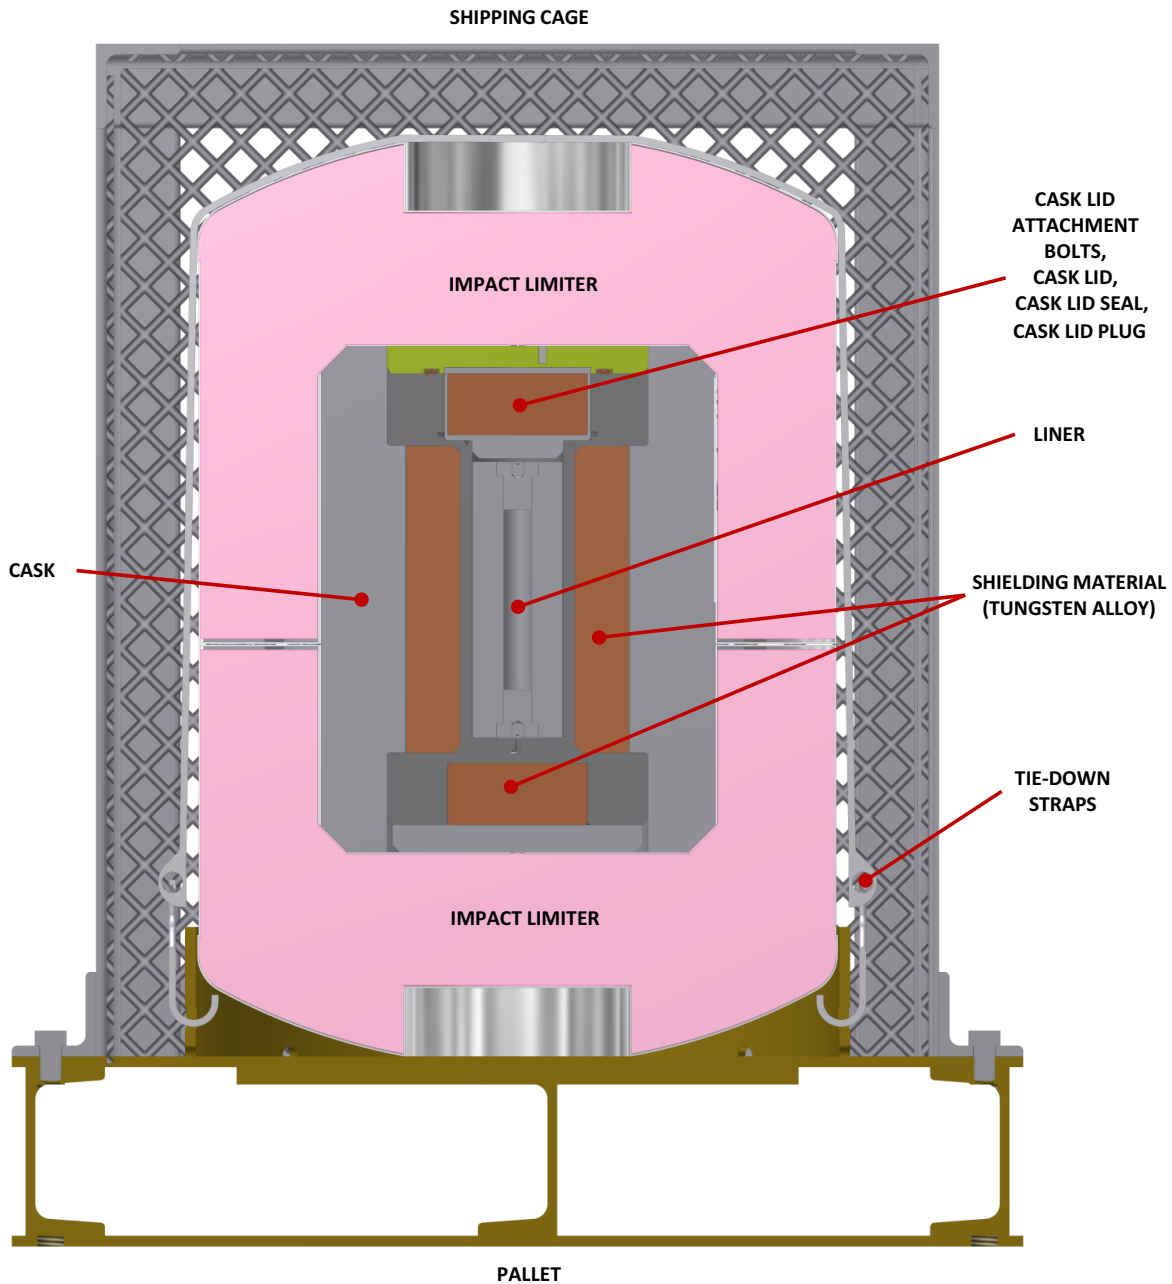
Assembled Transport Package Cutaway – Model AOS-025A
